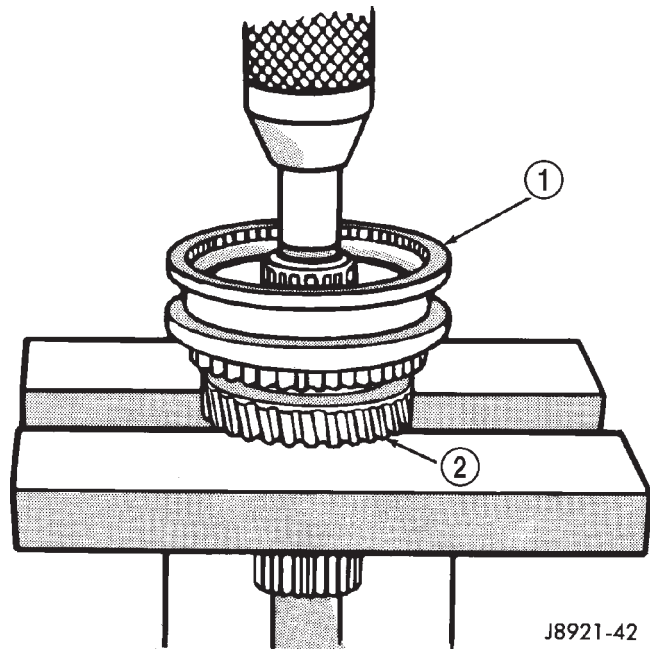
Remove 3-4 Synchronizer And Third Gear
